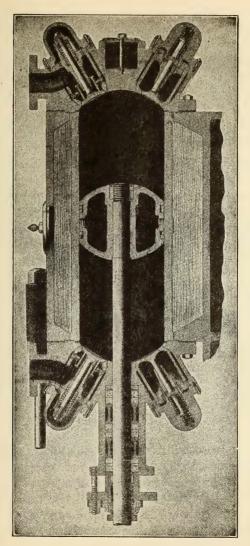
HORIZONTAL DOUBLE-ACTING MACHINE.
